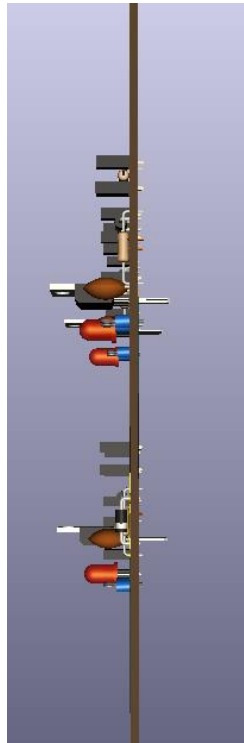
Thickness of the Printed Circuit Board for the Experiment
